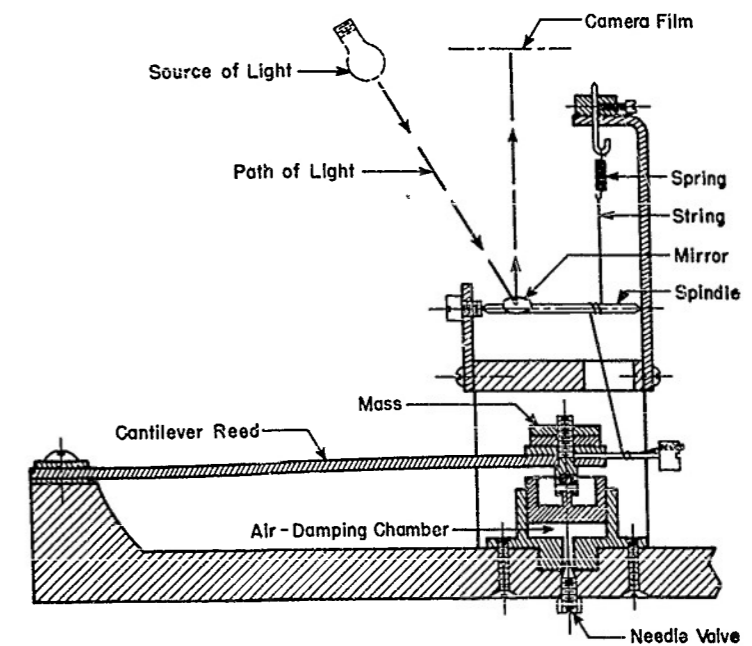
Cross Section of Vertical Element as Modified at the Taylor Model Basin
